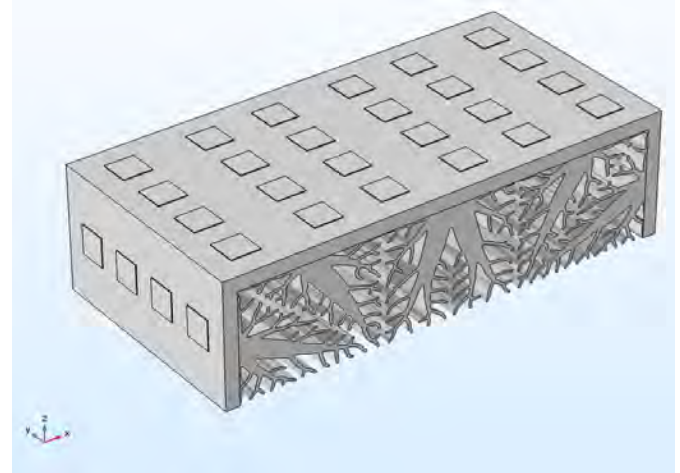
THE ASSEMBLED 3D HEAT SINK DESIGN FOR THE IPS
